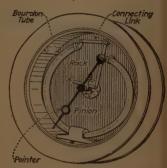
Interior of steam gage with double Bourdon tube. (Ashton Valve Co.)
